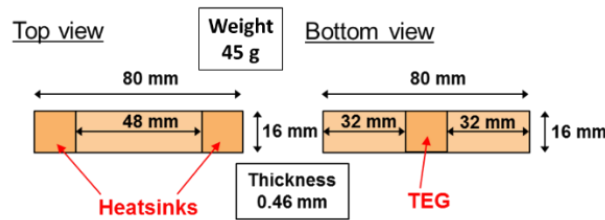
TEG-heatsink assembly geometry. Two novel heatsink are placed on a copper sheet which, in turn, is placed on the TEG.
